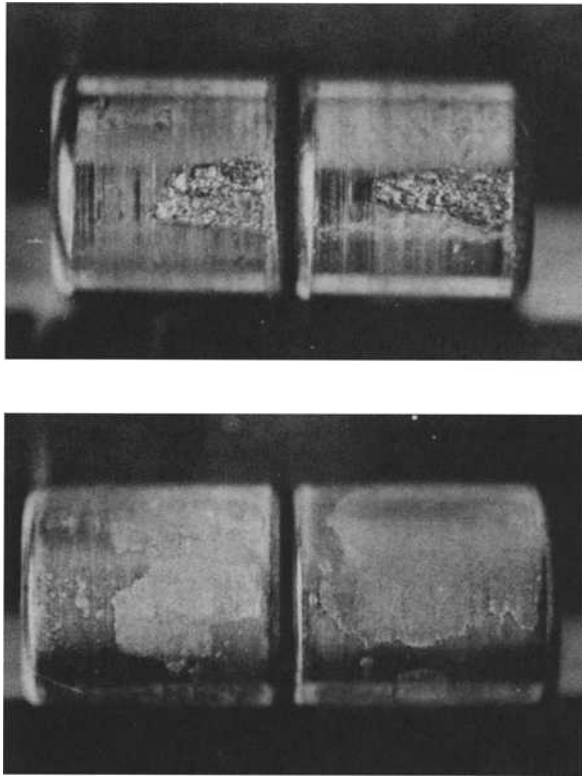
The appearances of flaking (top) and peeling (bottom) on cylindrical rollers.
